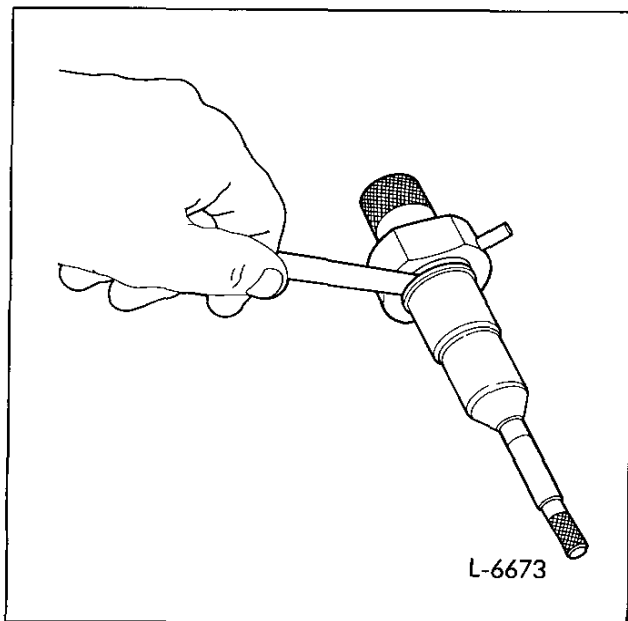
Measuring Clearance Between Installation Tool and Top of Hole Tube Flange
